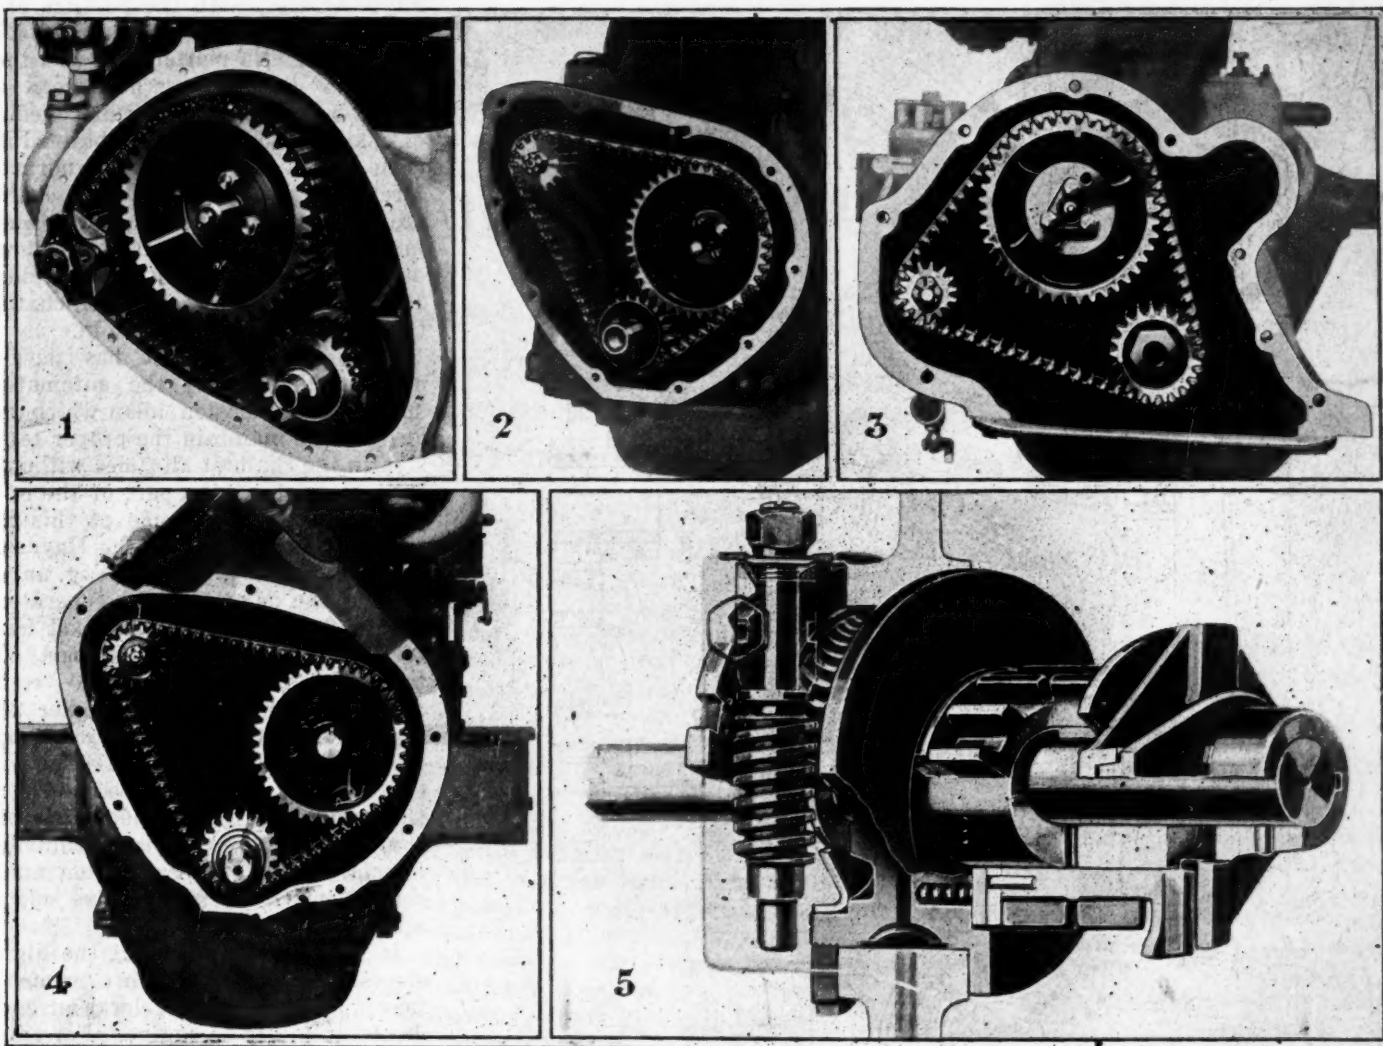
New front end chain drive on Hudson. This is a triangular Morse installation with eccentric adjustment. Fig. 2—Front end chain drive installation on the Continental 6Y engine. Fig. 3—Chain front end drive on the Jordan car. Fig. 4—A triangular front end chain layout has been adopted for the new Rickenbacker car. Note that all the sprockets have more than 90 deg. chain contact. Fig. 5—Morse single type of chain adjustment
